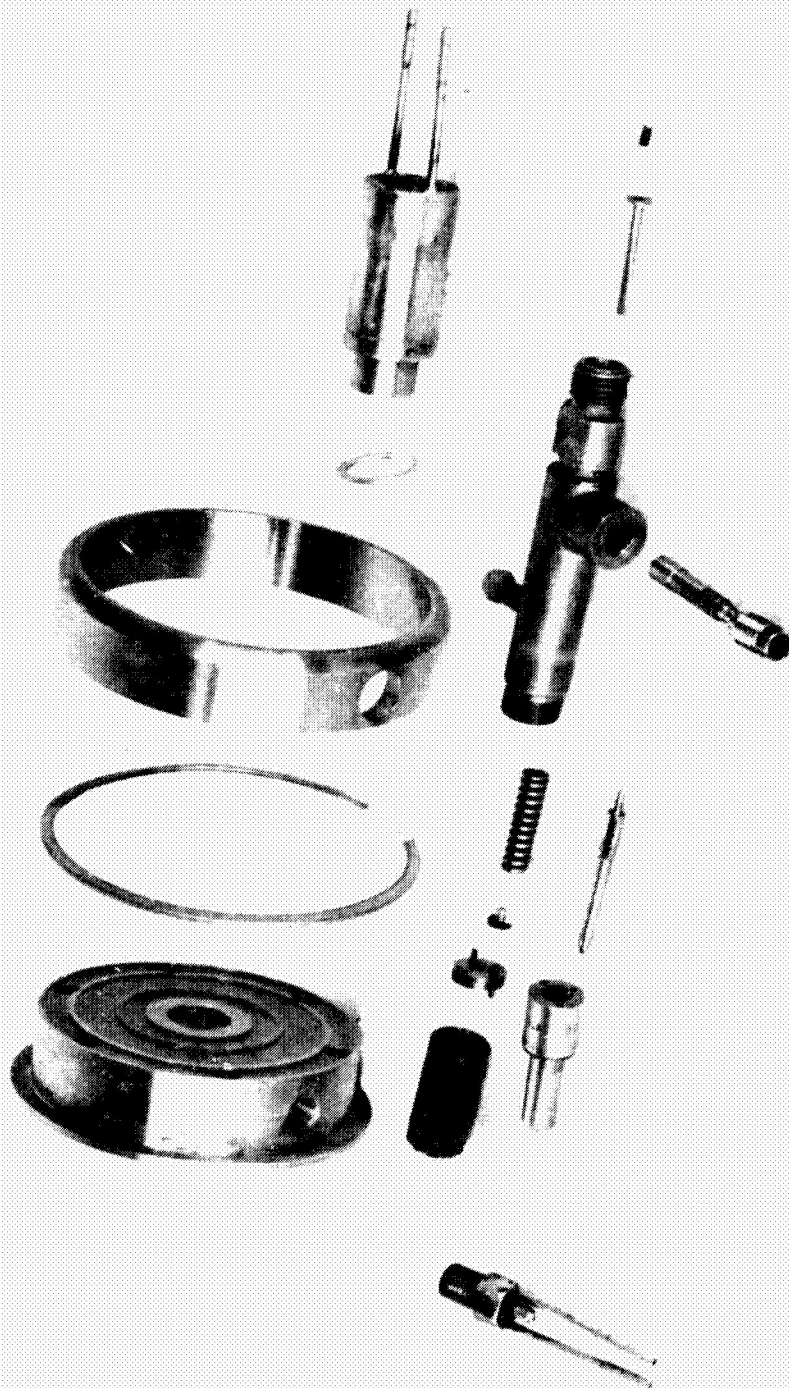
Injection Nozzle Holder Assembly and Combustion Bowl Insert
